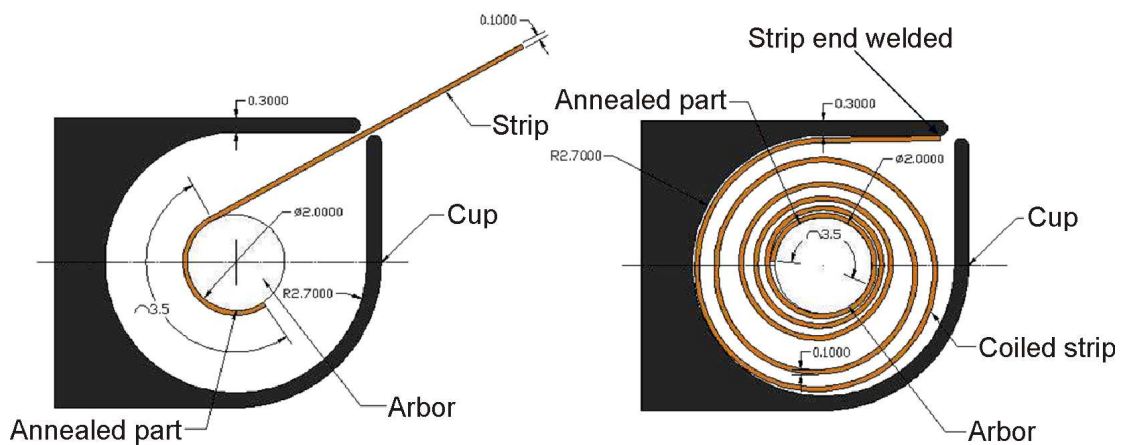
Schematic of the clock spring assembly before and after spring forming
